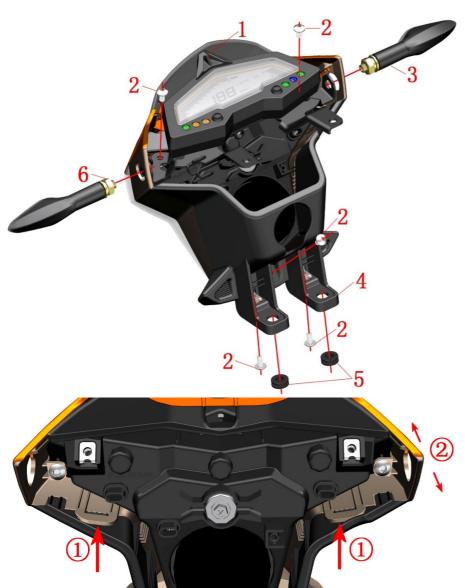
FRONT FORK		Head assembly 2	CHK	(2)
